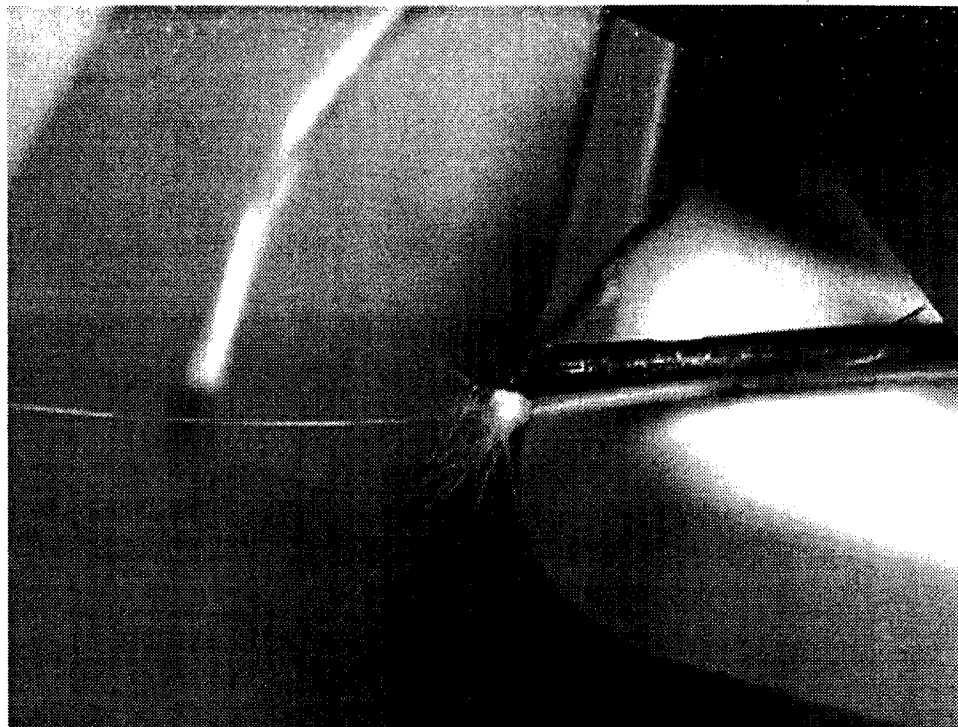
The teflon tube is heated on a hot plate to cure the resin
